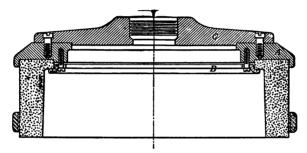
Section through wheel dowel used on the Pratt & Whitney vertical surface grinder.
